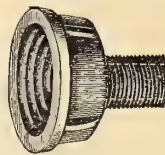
Coupling, small end cut 1/4-inch pipe thread to fit our spray nozzles, large end cut to fit 3/8-inch, 1/2-inch or 3/4-inch male hose coupling.
